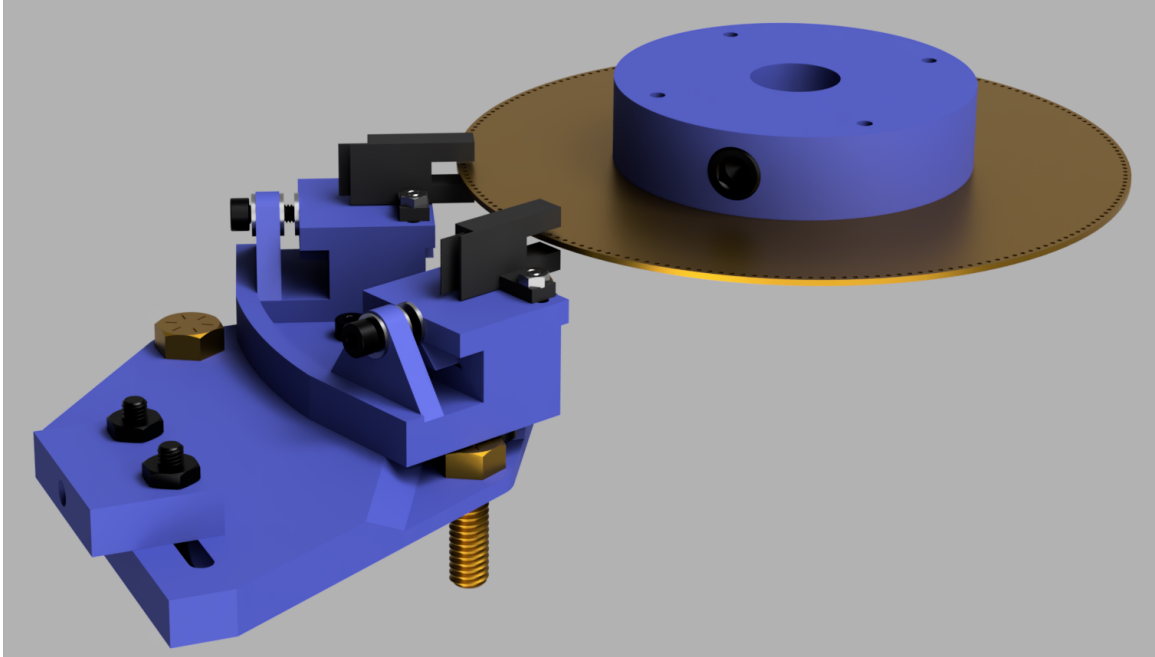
The Y-axis encoder was designed to utilize the mounting points already available on the 1940s era milling machine.
